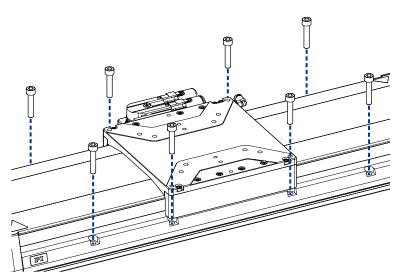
Mounting the V-417.xx6211E0 onto an underlying surface
